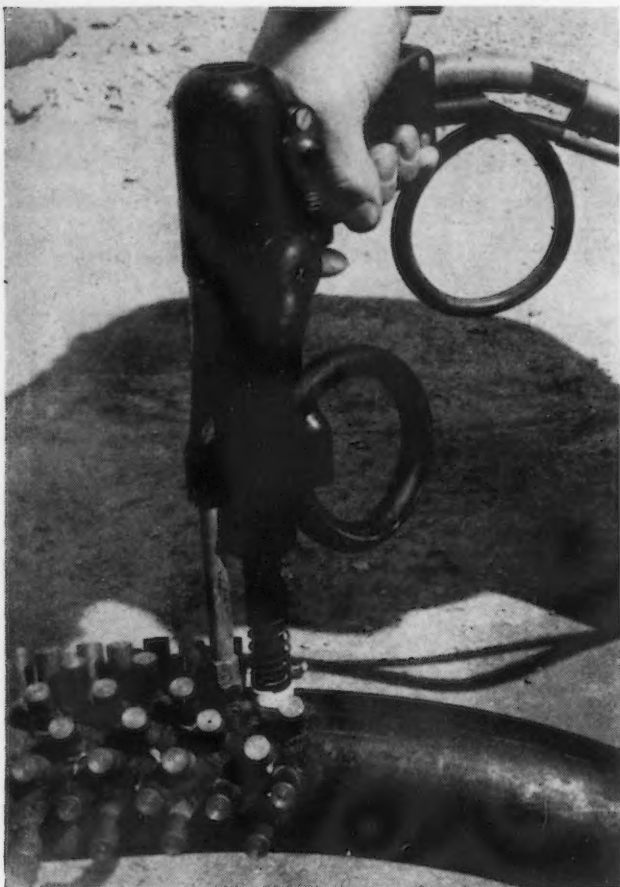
Welding studs on a boiler tube with a Nelson manual stud welder is a fast and easy process.
